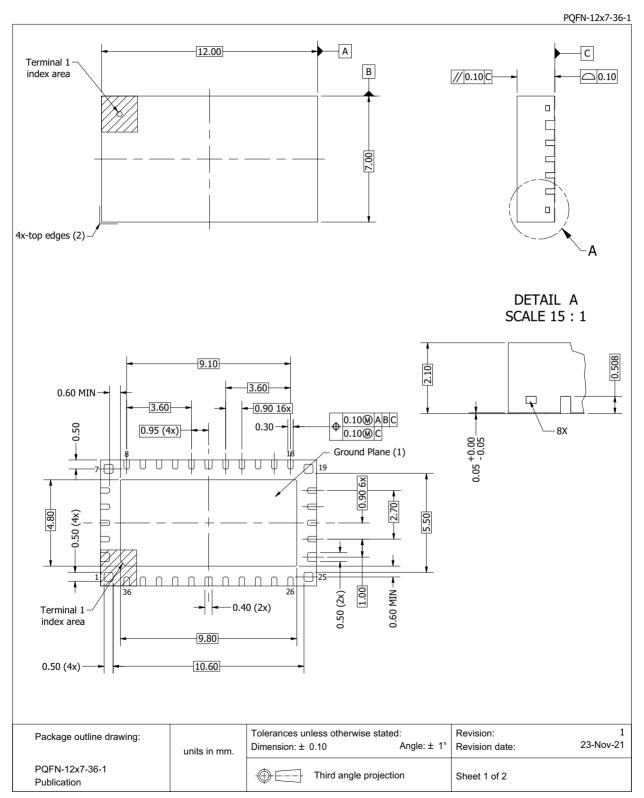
Package outline PQFN-12x7-36-1 (sheet 1 of 2)
